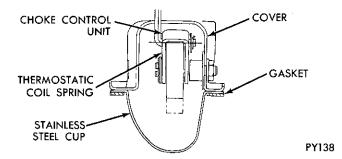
Choke Control (Open Well) 8-cylinder Engine
